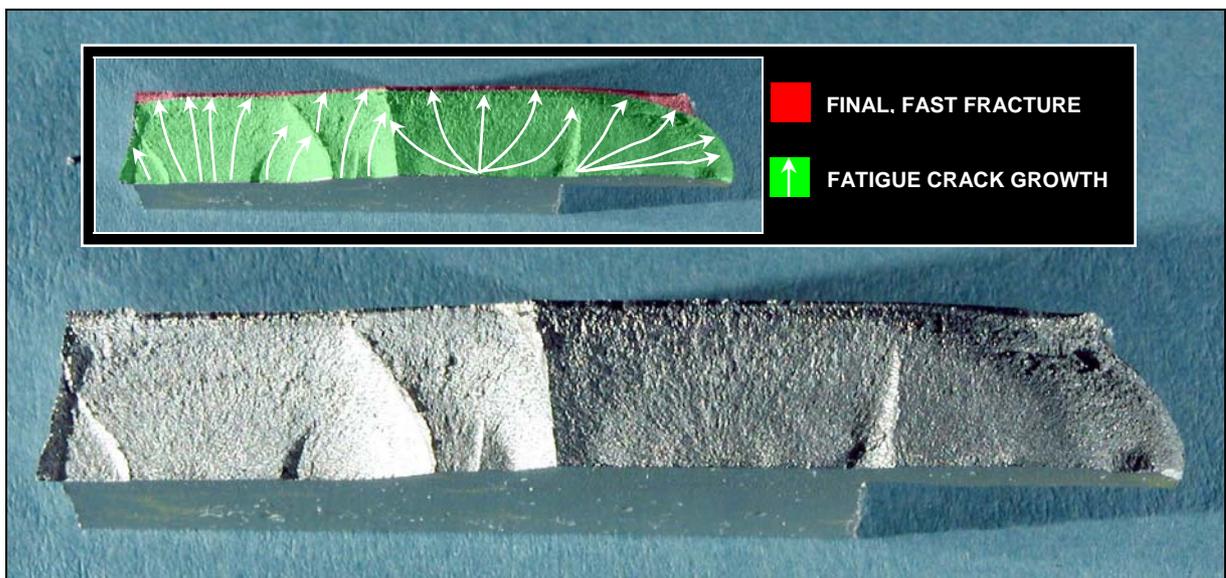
Close view of the fracture surface of section B, as indicated in figure 3. Fatigue cracks had initiated at the concave surface of the spring and grew primarily in the direction of the convex surface.
